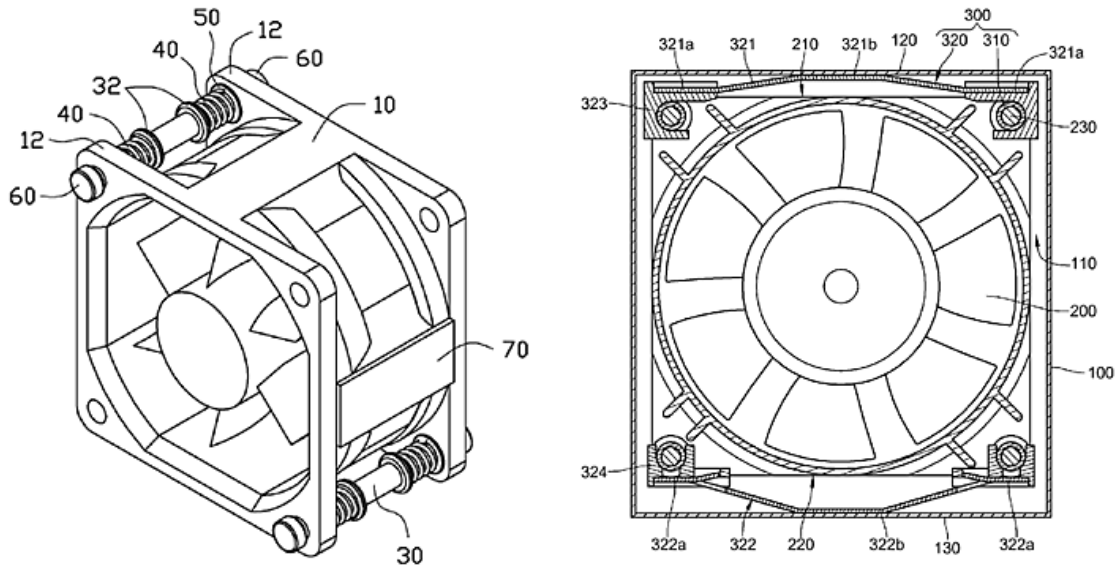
Schematics of Floating Spring Designs (Left: coil spring ; Right: leaf spring) [40], [41]
